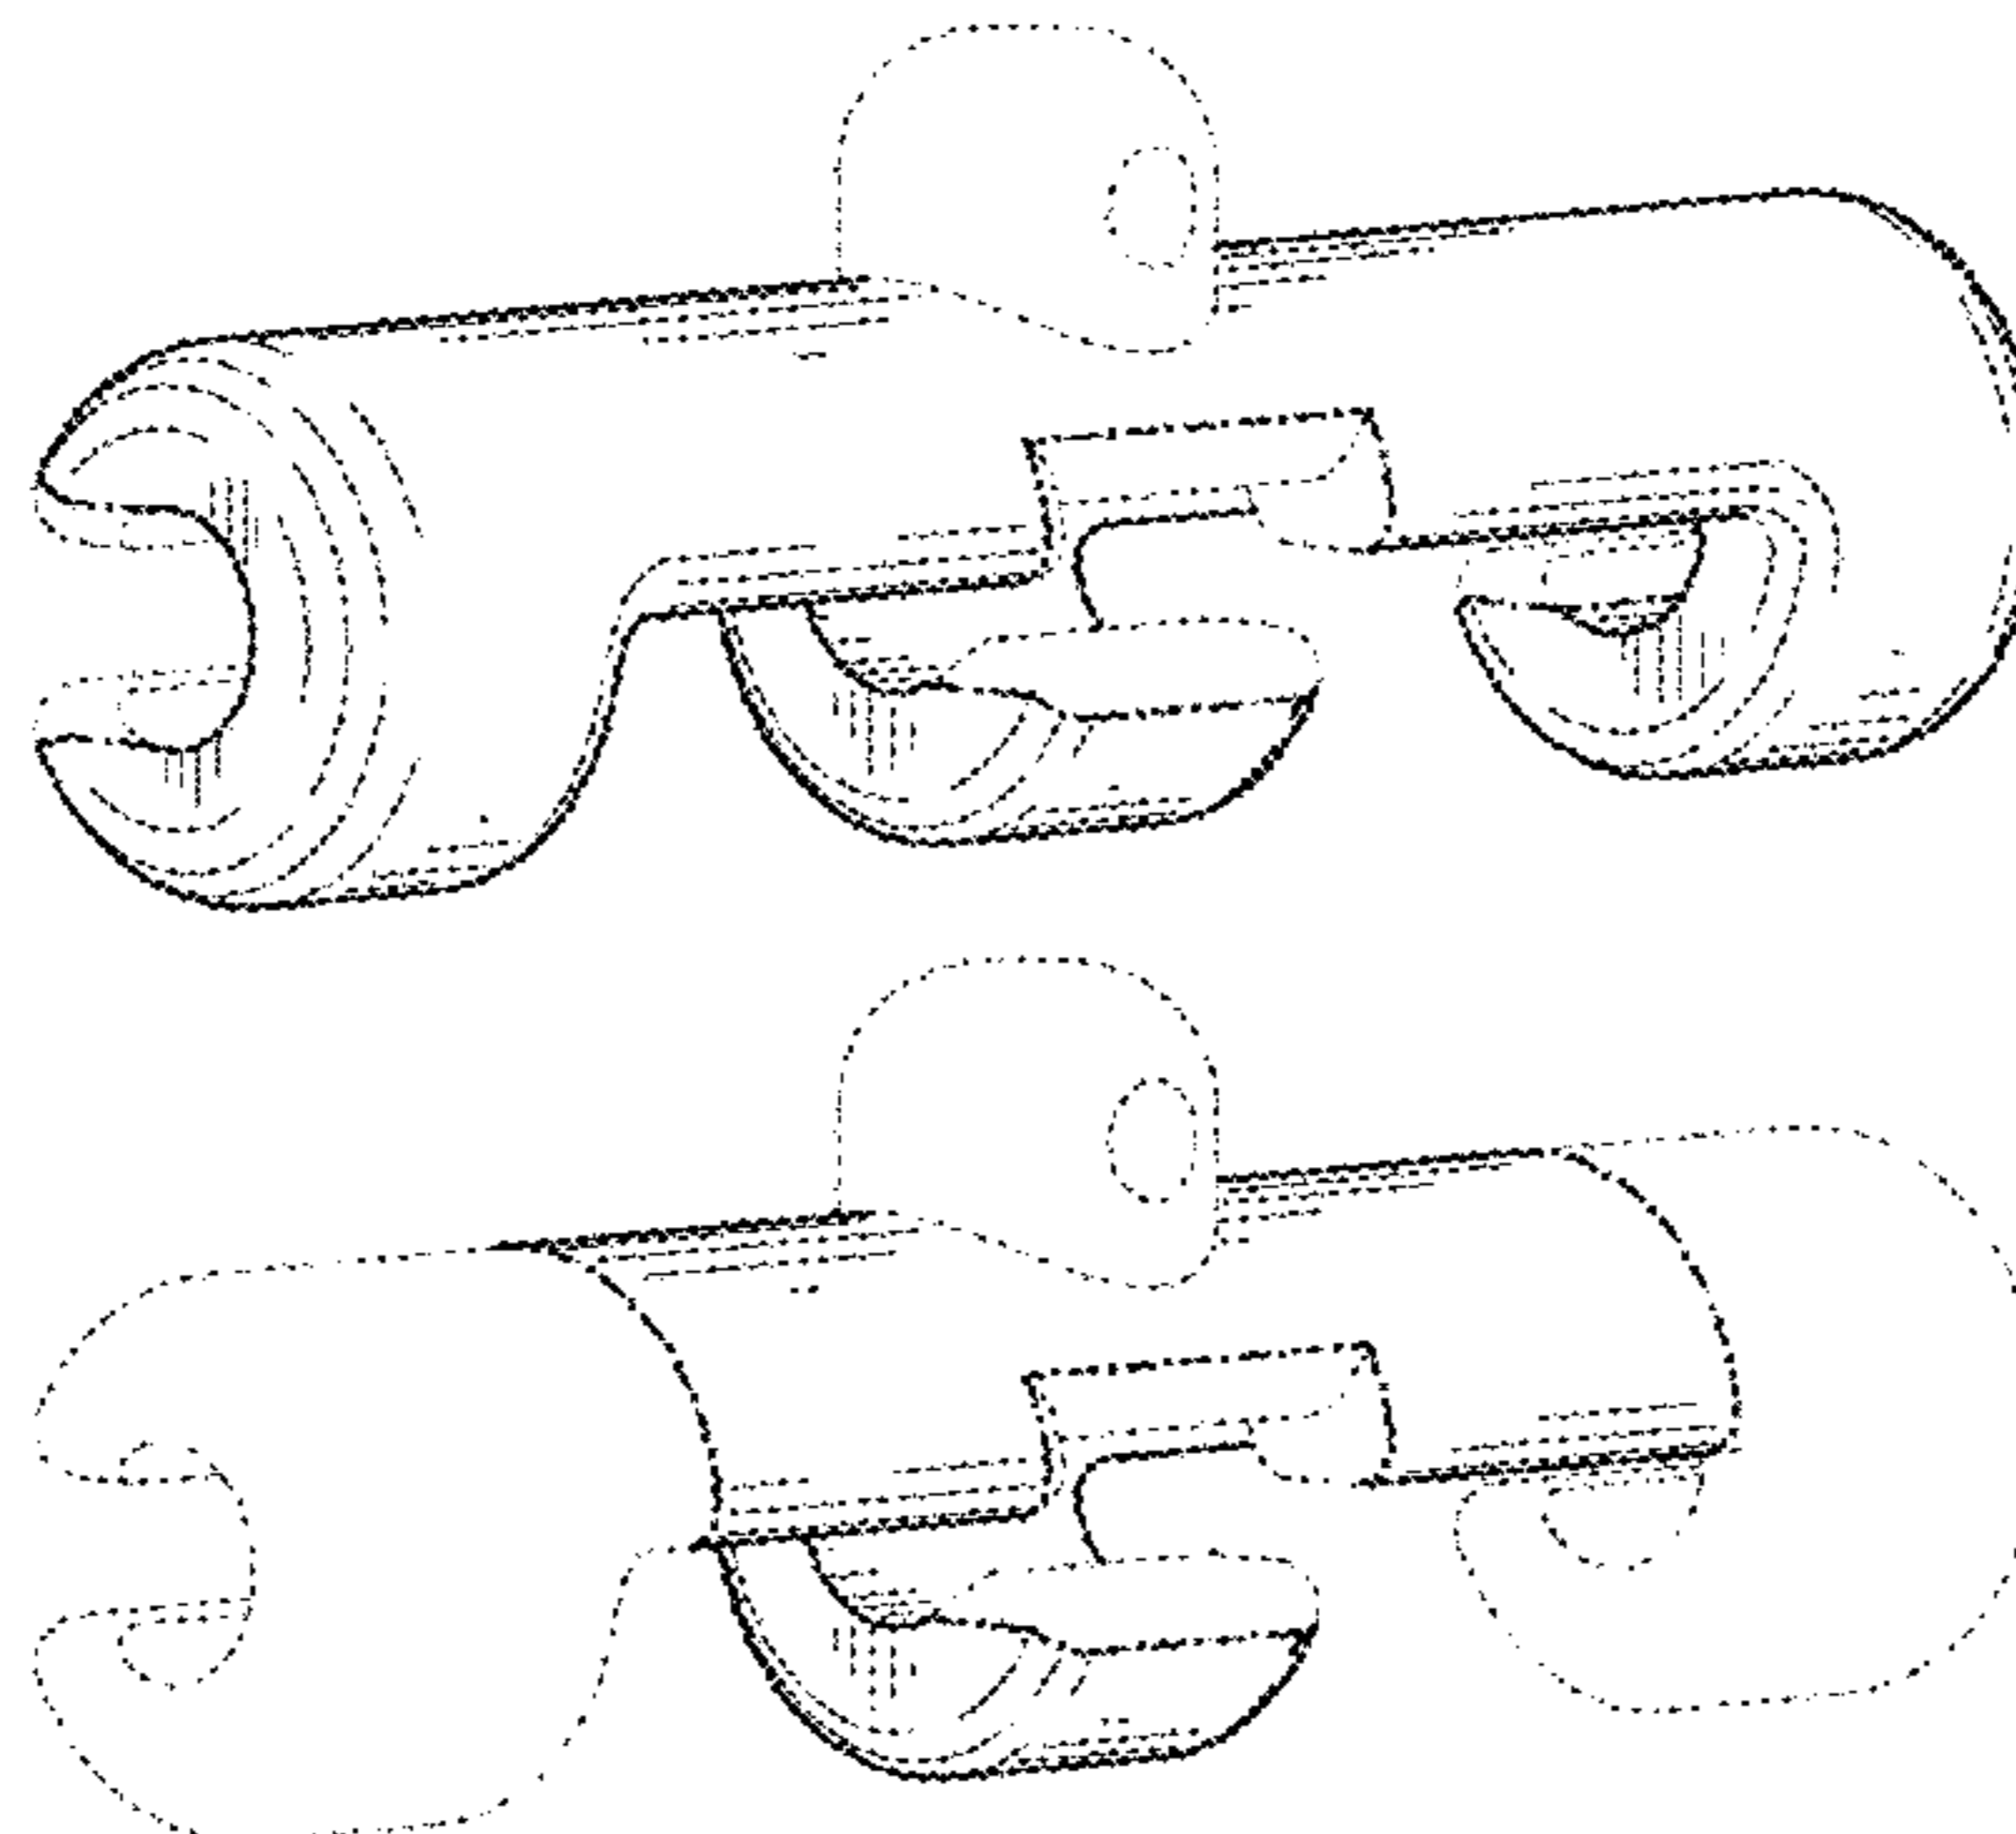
is a bottom perspective view of the IV-tube cradle thereof;
